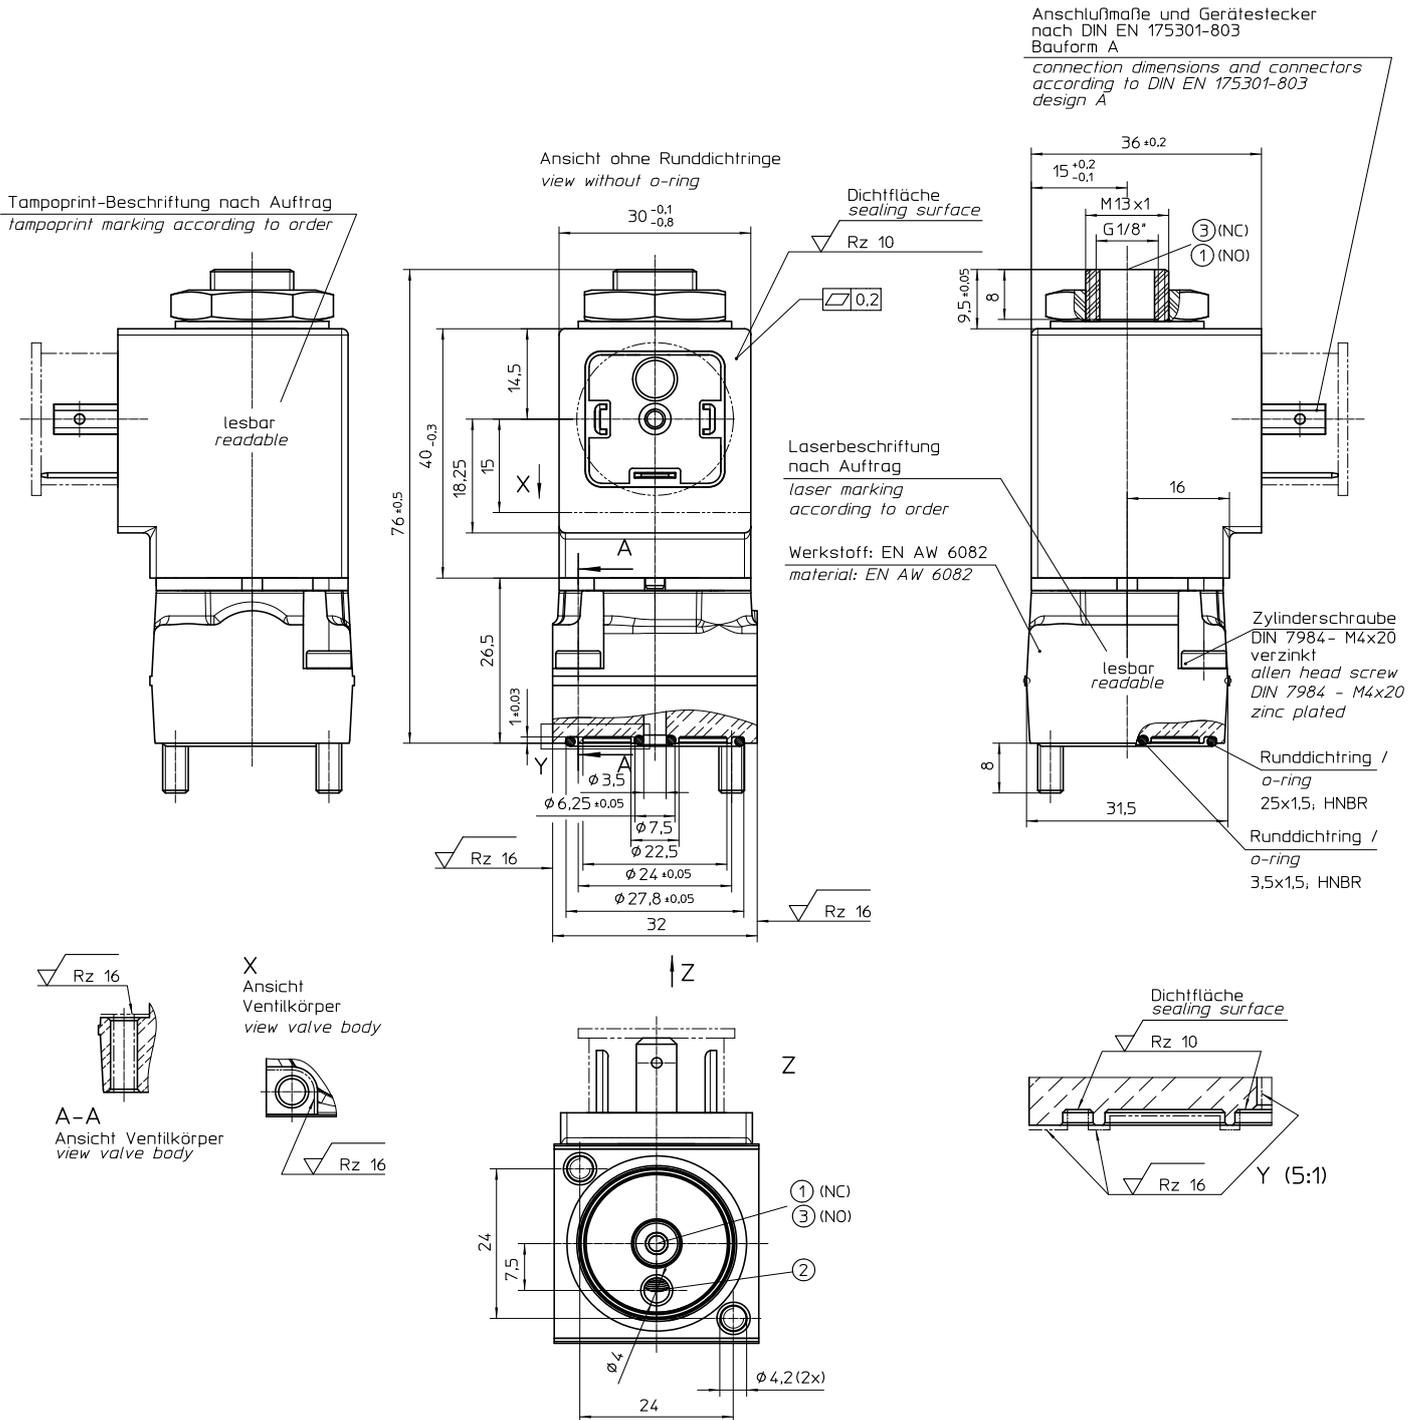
Valve 902337, 902340, 902343, including solenoid body 902331
